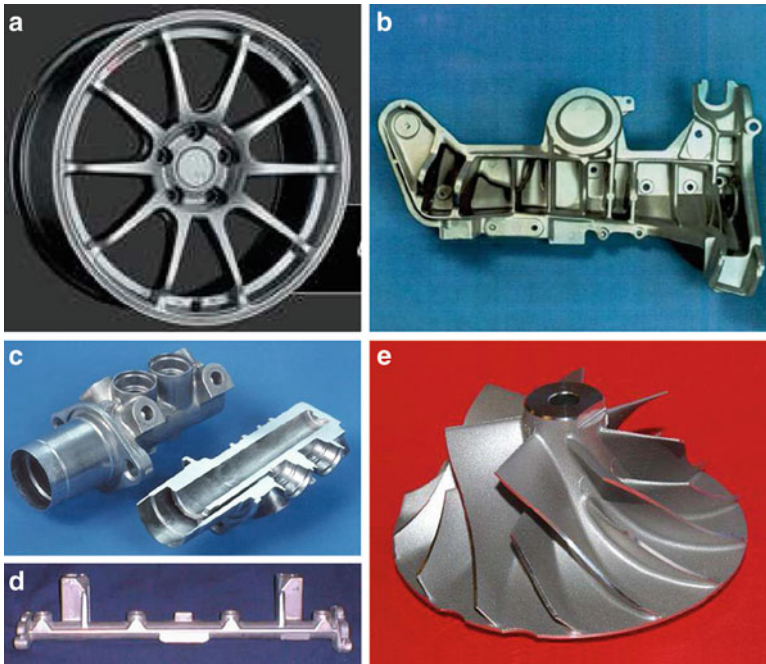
Examples of high quality semi-solid castings. (a) Aftermarket automobile wheel produced by SSR [3], (b) suspension component produced by Stampal for Alfa Romeo [3], (c) master brake cylinder [3], (d) fuel rail [4], (e) turbocharger impeller produced by ACC for Cummins Turbo Technologies [5]
